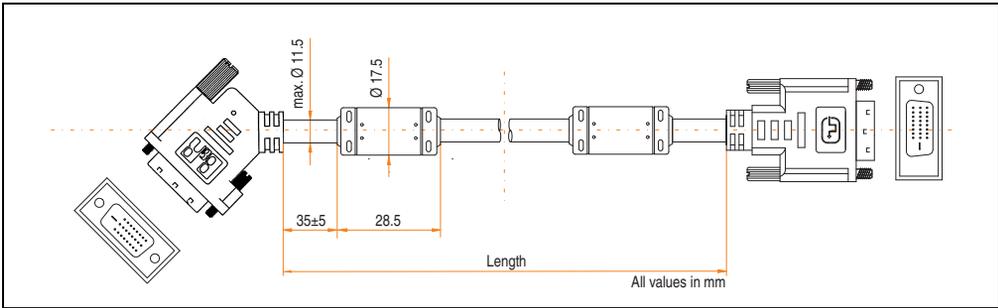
Dimensions - SDL cable with 45° plug 5CASDL.0xxx-01
